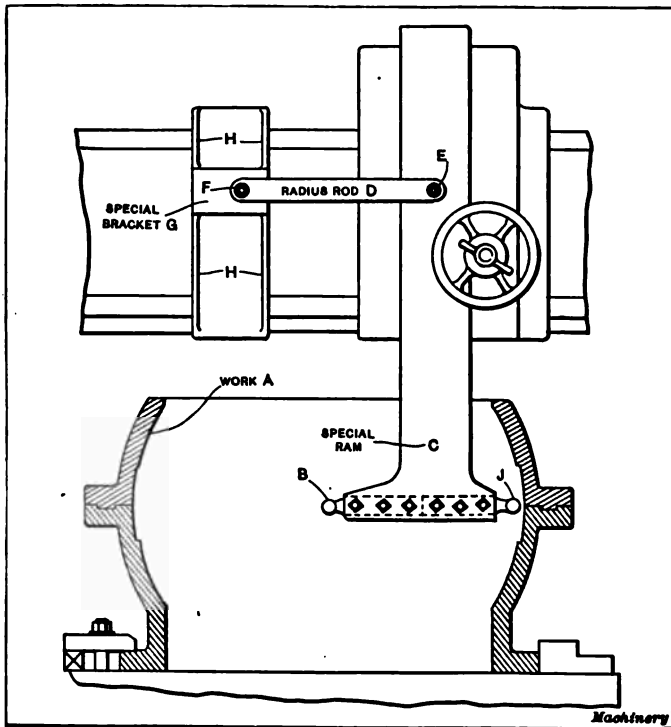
Attachment shown in Fig. 15, used for Internal Work
